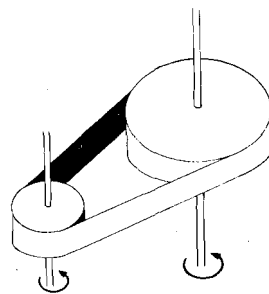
Belt drive found in the charkha, home sewing machine and the fan of an automobile engine.
